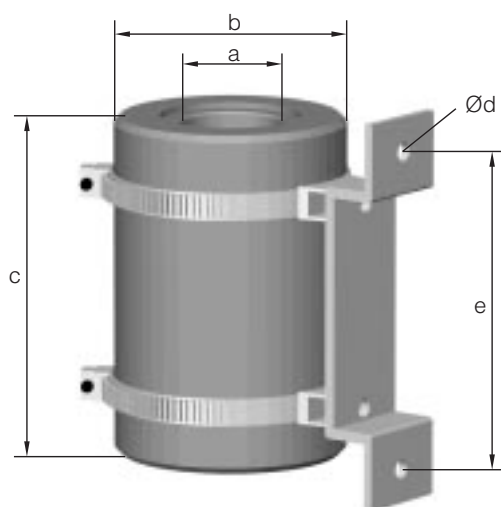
Dimension drawing, ferrite rings for Alspa MV1000
